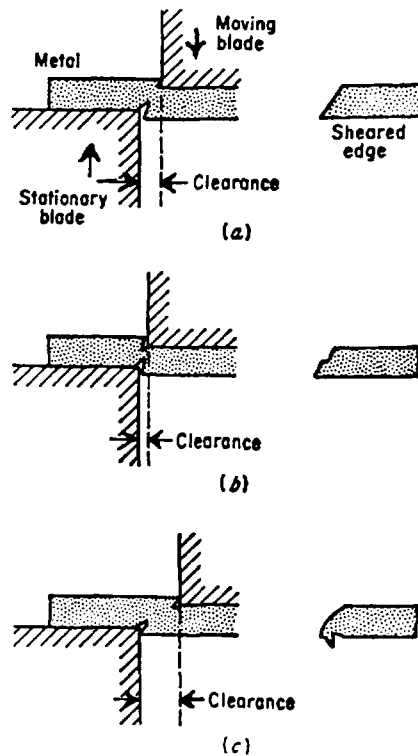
Shearing of metal; (a) proper clearance, (b) insufficient clearance, (c) excessive clearance.
